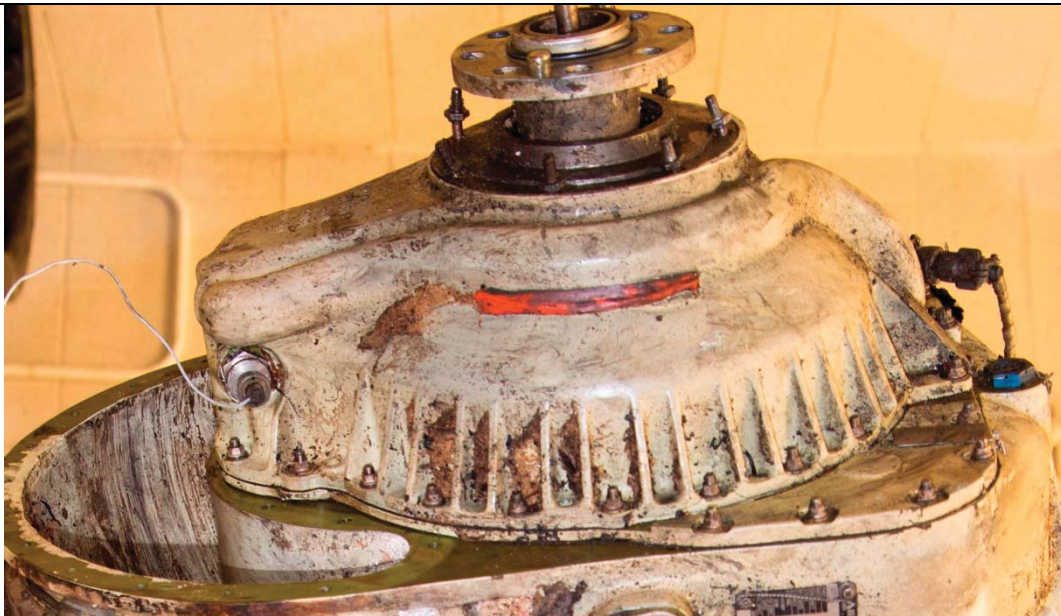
P-79297C, Nose Cone Assembly, Cracks/Fractures
